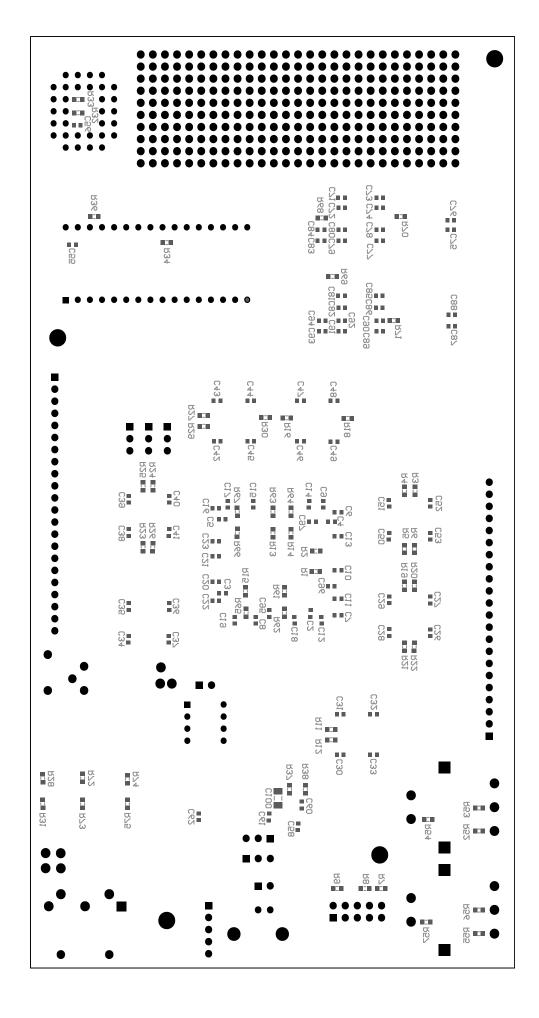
Back side of the system's Printed Circuit Board (PCB). Note that this side is only used for routing and placement of passive parts, such as resistors and capacitors.
